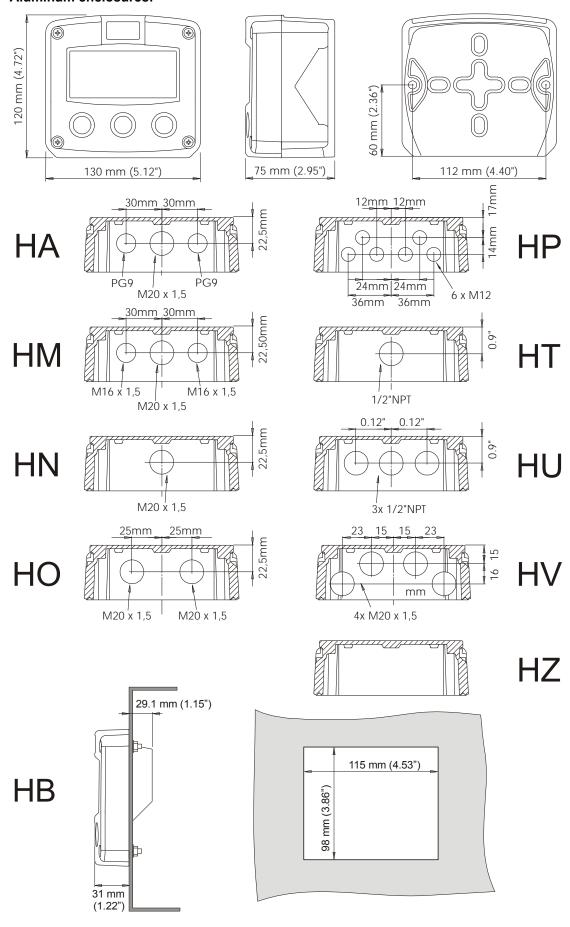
Dimensions Aluminum enclosures. HF010AEN_v0403_03 Atex_IECEx_CSA_FM
